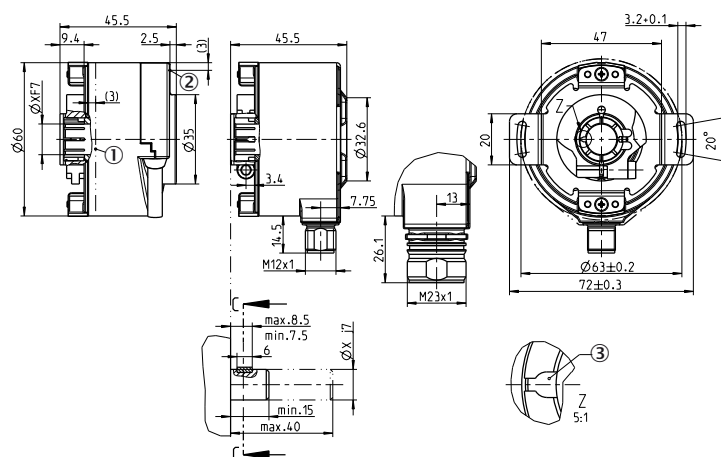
Dimensional drawing of through hollow shaft with cable outlet, M12 or M23 male connector (all dimensions in mm)
